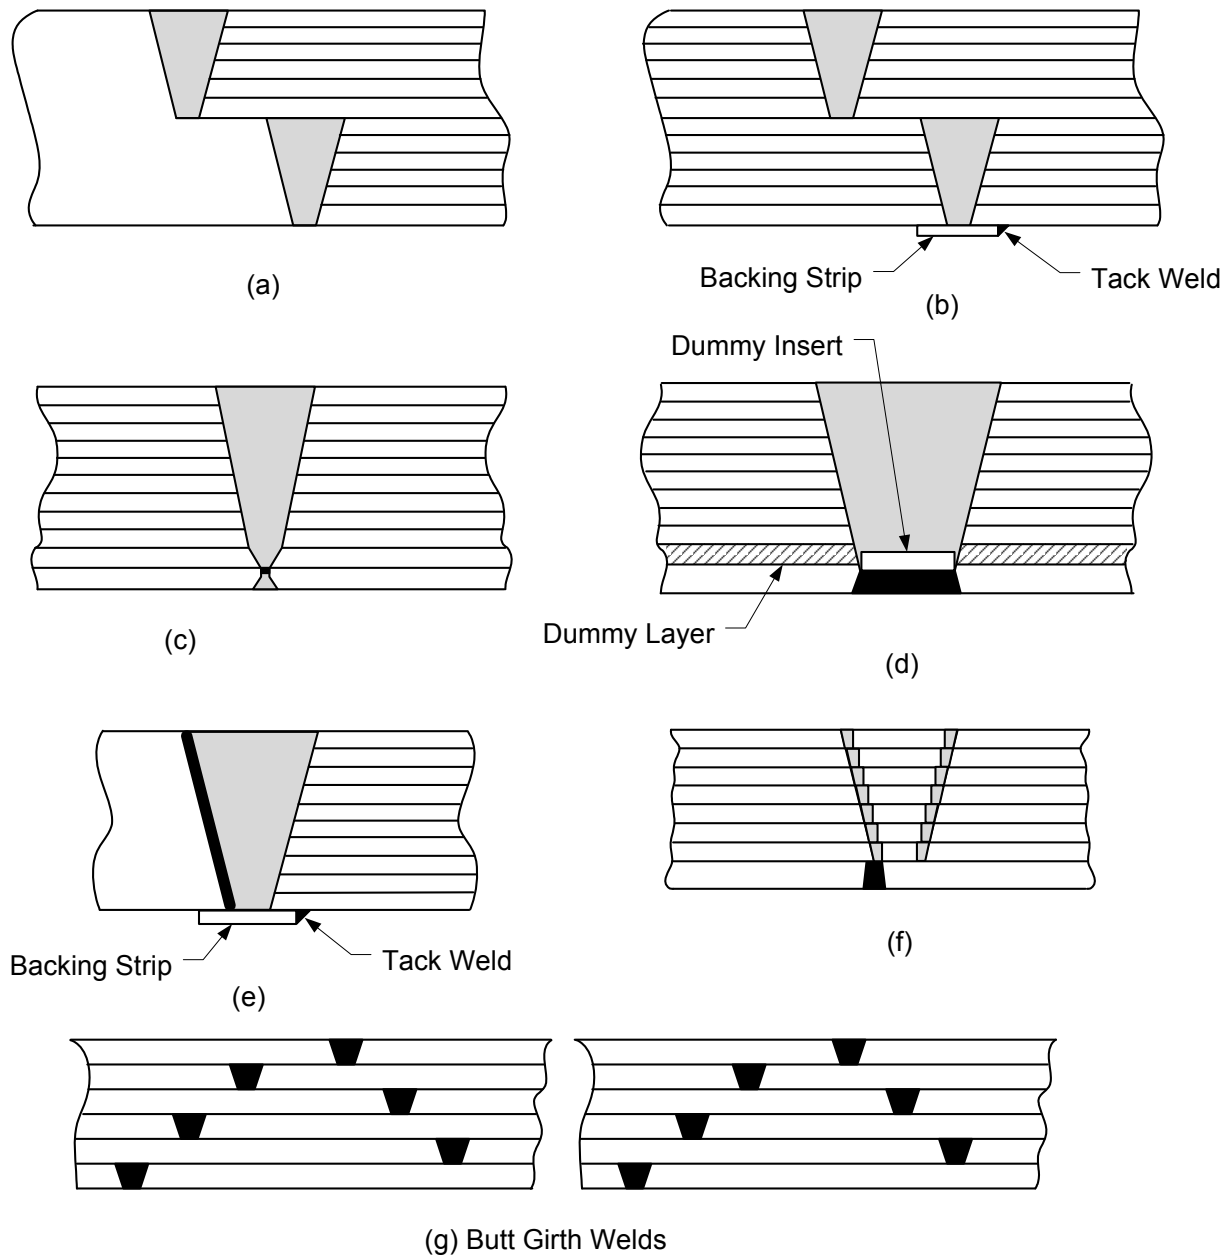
Some Acceptable Welded Joints of Layered-To-Layered and Layered-To-Solid Sections
